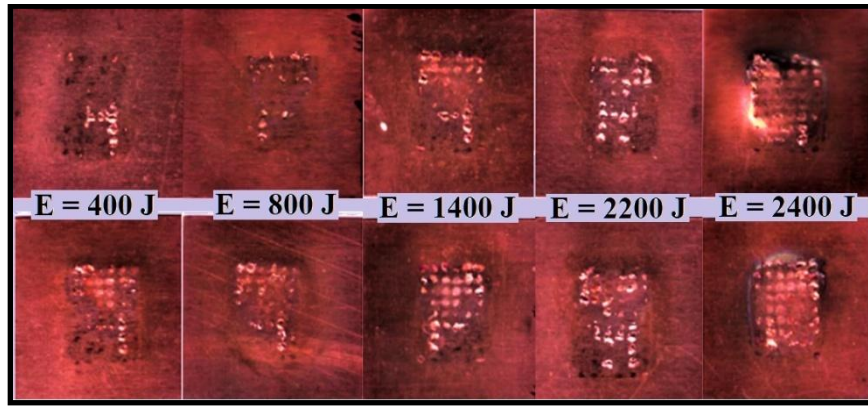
PB-PB fractured specimens in the tensile-shear strength test showing increasing weld area with increasing weld energy. Upper and bottom sheets are shown in upper and lower rows respectively
